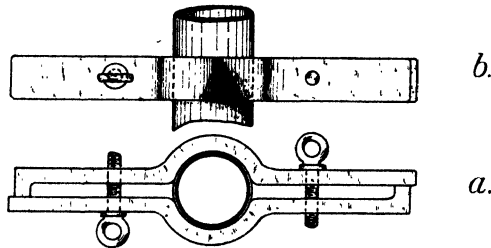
Pipe Clamp : (a) Plan ; (b) Elevation.
